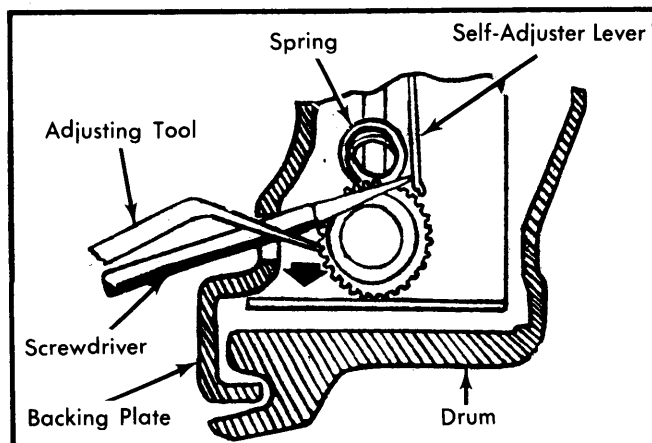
Adjusting Brake Shoe Clearance (Through Backing Plate)
